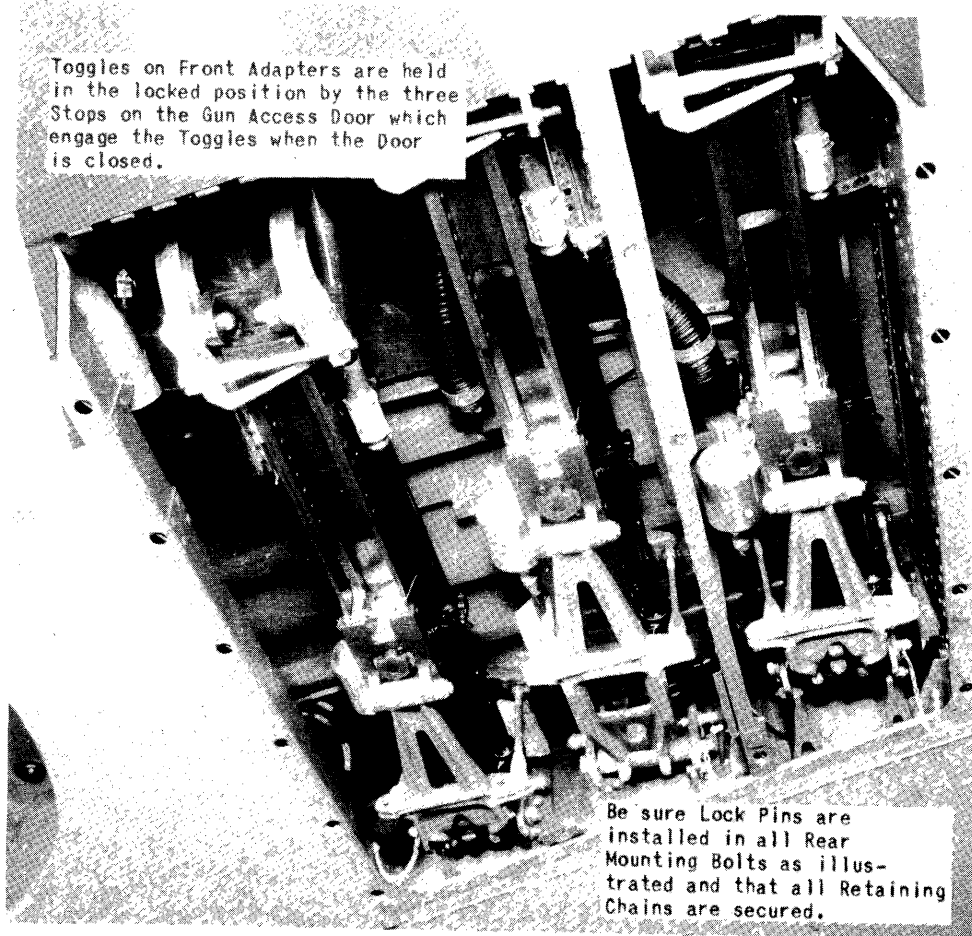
Guns Installed in Left Wing Panel - Looking Aft
